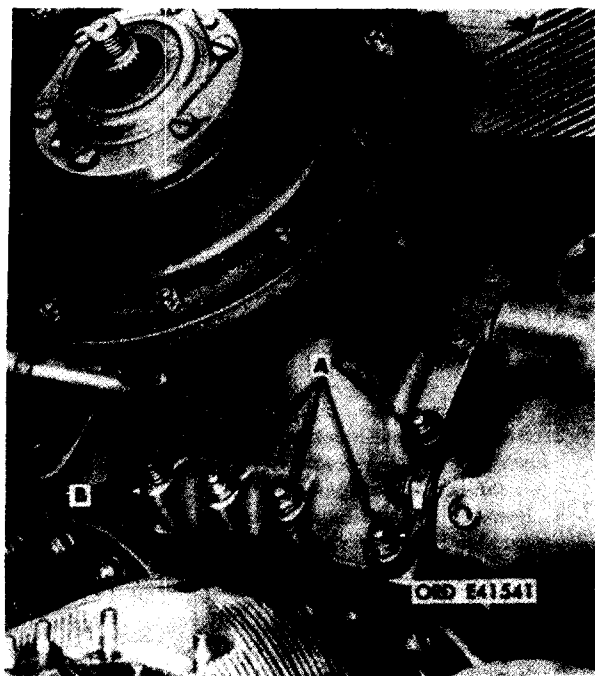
Horizontal fan drive shaft positioned for removal of front fan drive housing.
